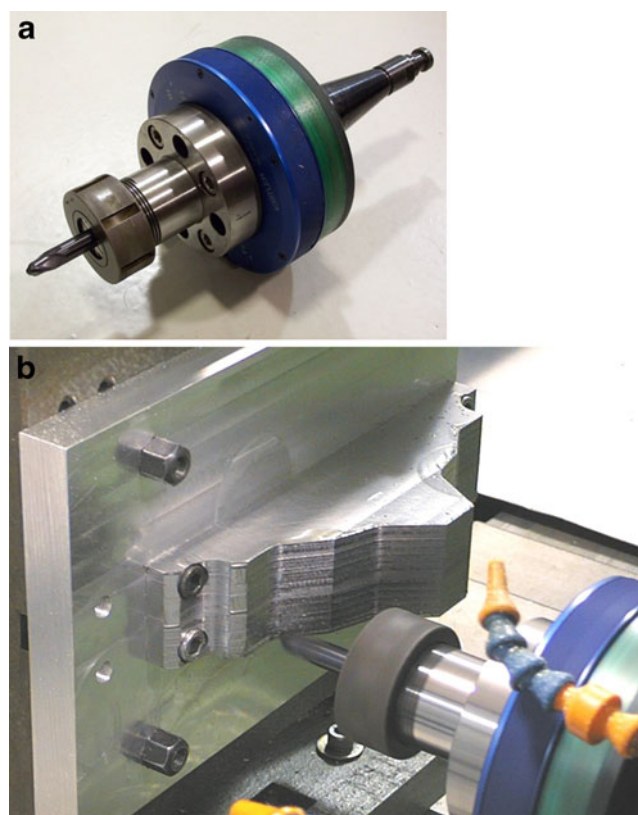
Machining setup: a ensemble unit of dynamometer, tool holder, and ball-end mill and b close-up view of ball-end mill and calibration work part
